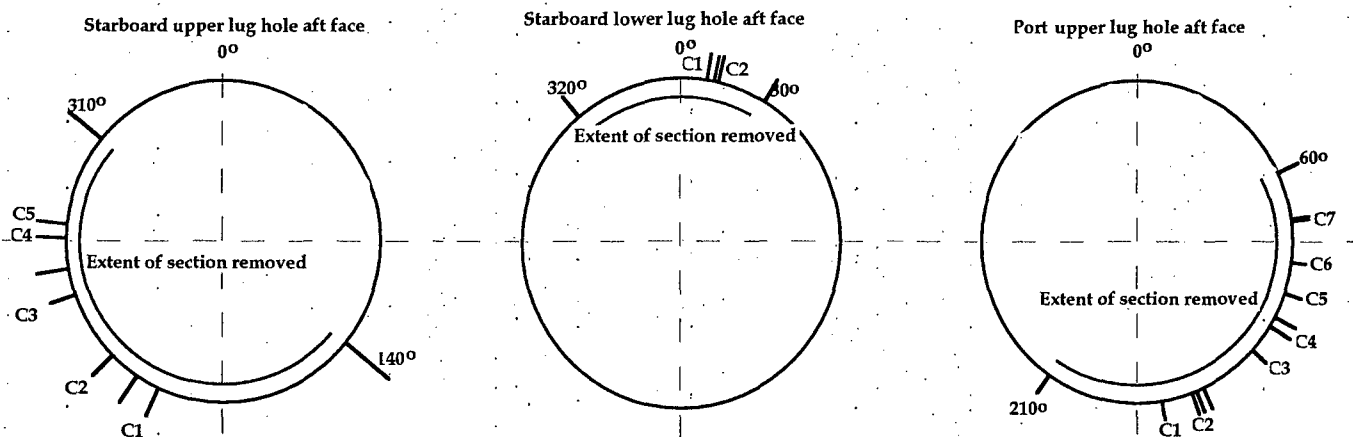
A schematic diagram of the approximate positions of the observed cracks in the edge of the wing-attachment holes. The red line indicates the region of material removal. The cracks that were opened and examined by fractography are marked 'C1, C2, etc'.
